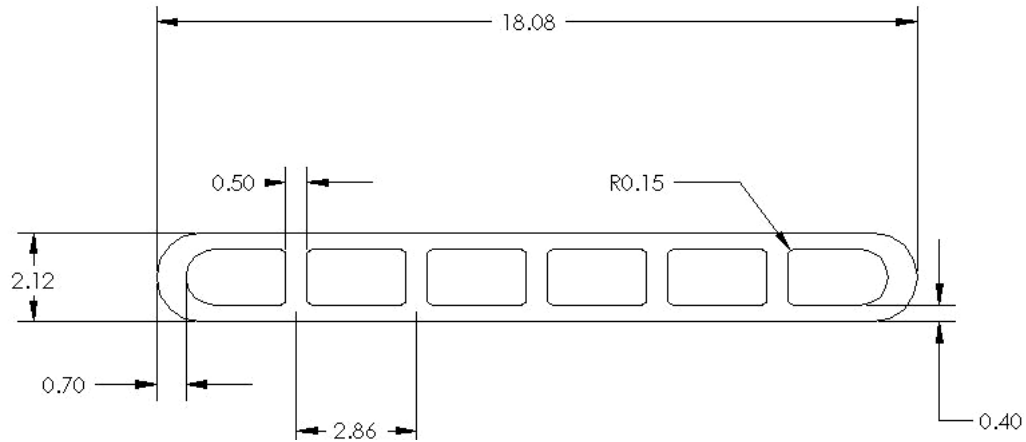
Cross-Section of Microchannel, with dimensions in millimeters
